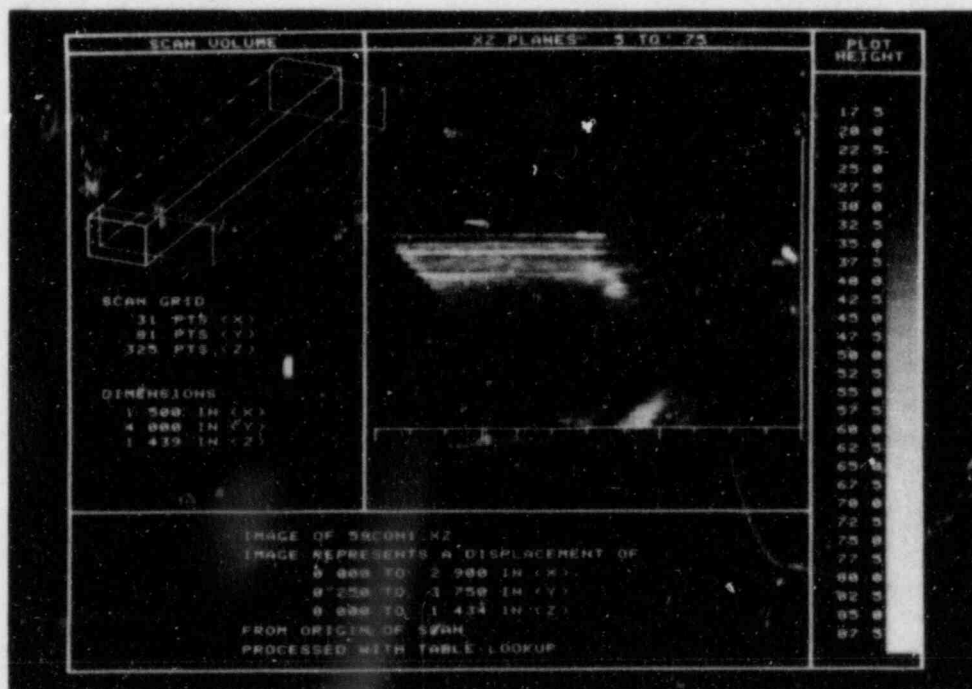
Cross-sectional View of Weld 59 at Vermont Yankee. SAFT pulse-echo technique used.
